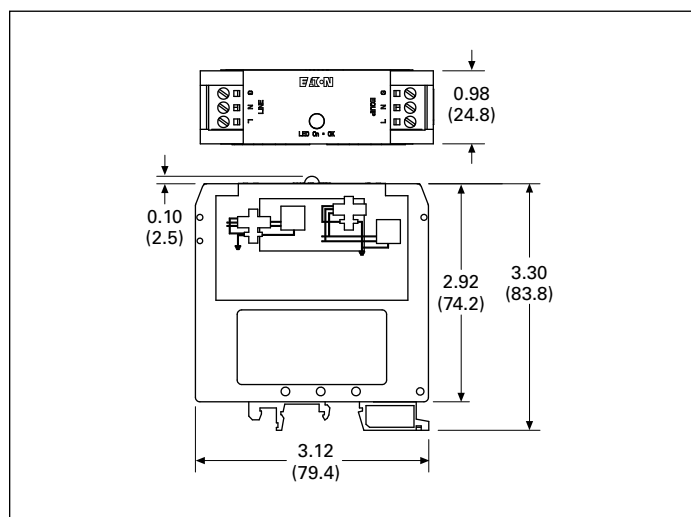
AGCFxxx10-DIN Dimensions in Inches (mm)
